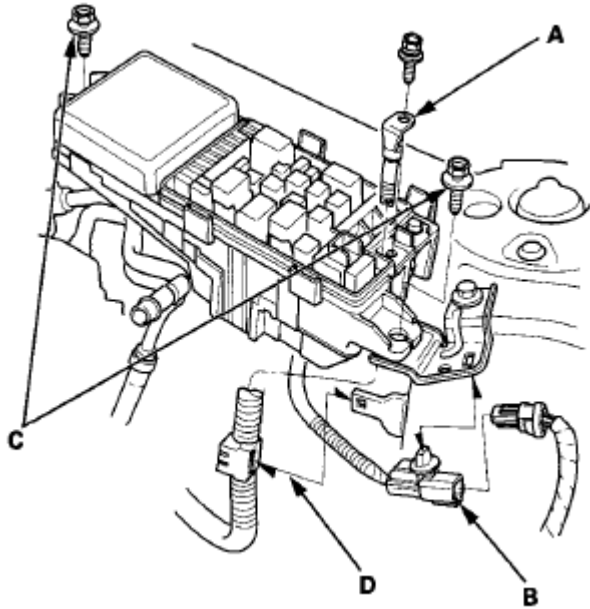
Removing Battery Cable Terminal From Under-Hood Fuse/Relay Box
